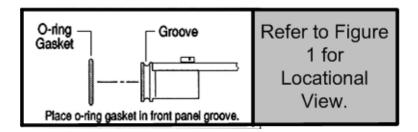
Rubber O-Ring Gasket PMC Board Installation
